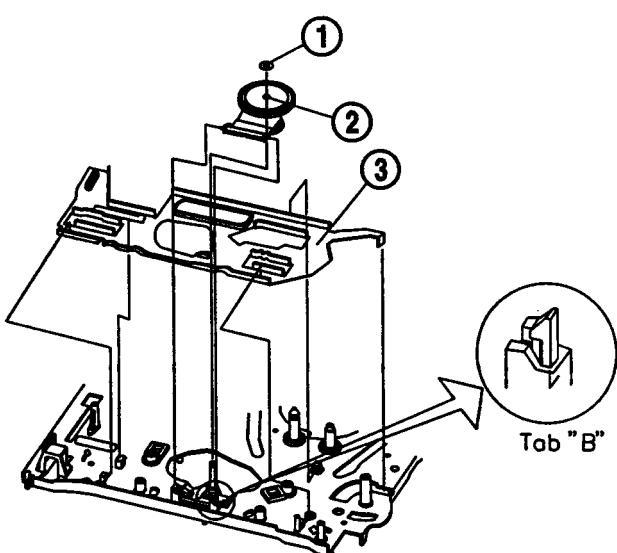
Reel gear total ass'y and Connect Plate Removal
